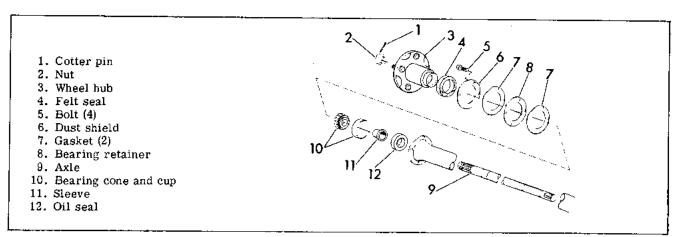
B-12A. Rear Axle (1973 to Early 1977) - Exploded View
